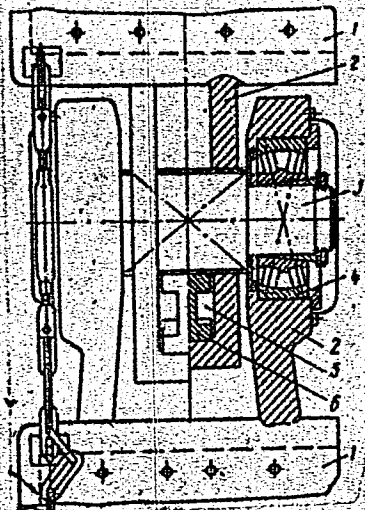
1- pontoons; 2- brackets; 3- hinge axis; 4- radially-spherical bearings; 5- slot; 6- wedge
